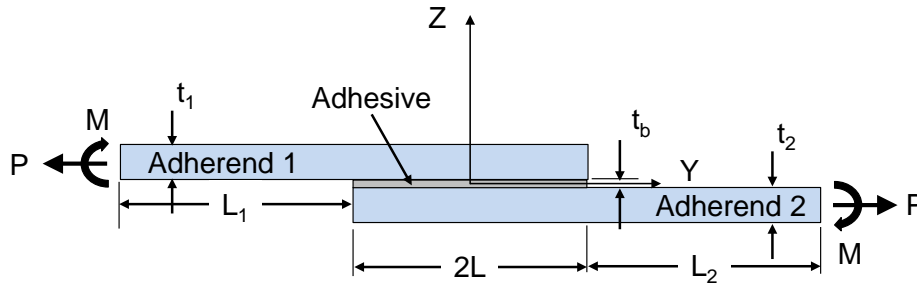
Adhesively Bonded Single Shear Lap Joint Geometry.
